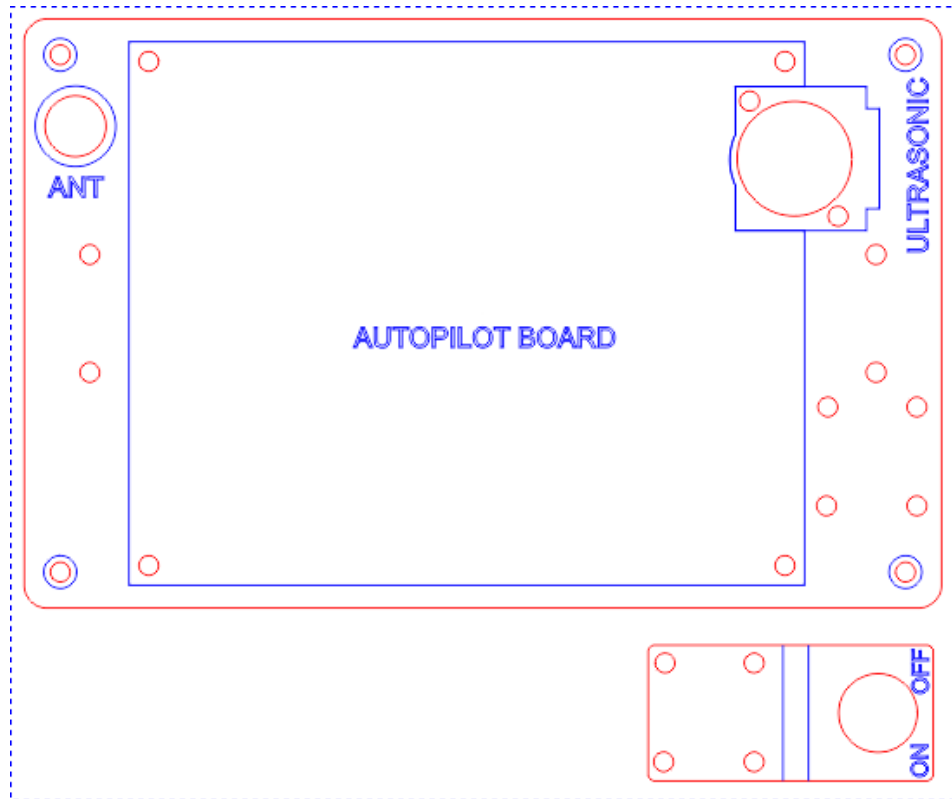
Acrylic Cutter Final Design in CorelDRAW v14.0
